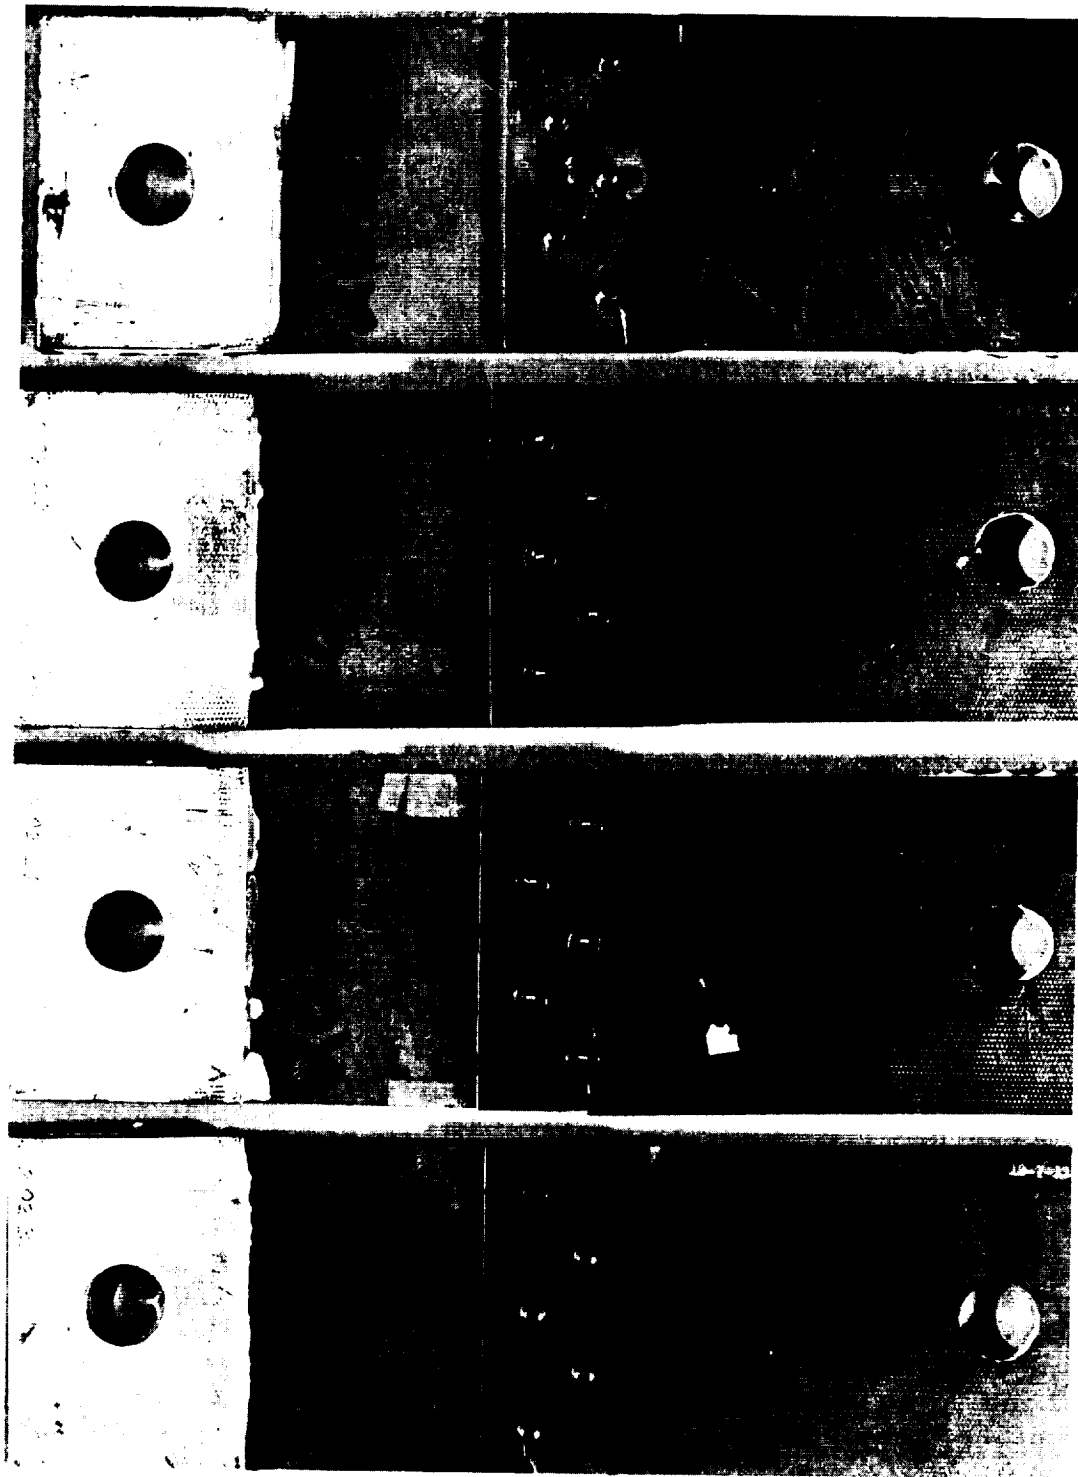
TYPE IIB SPECIMENS - TYPICAL FAILURE MODE
